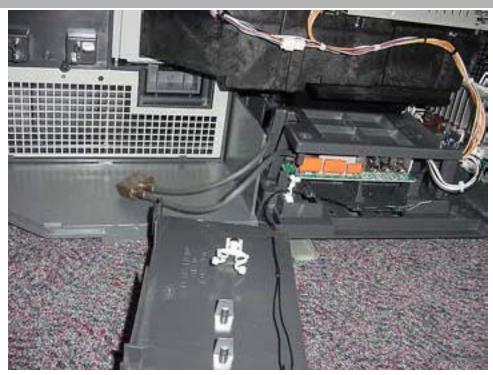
COMPLETE POWER BLOCK ASSEMBLY
